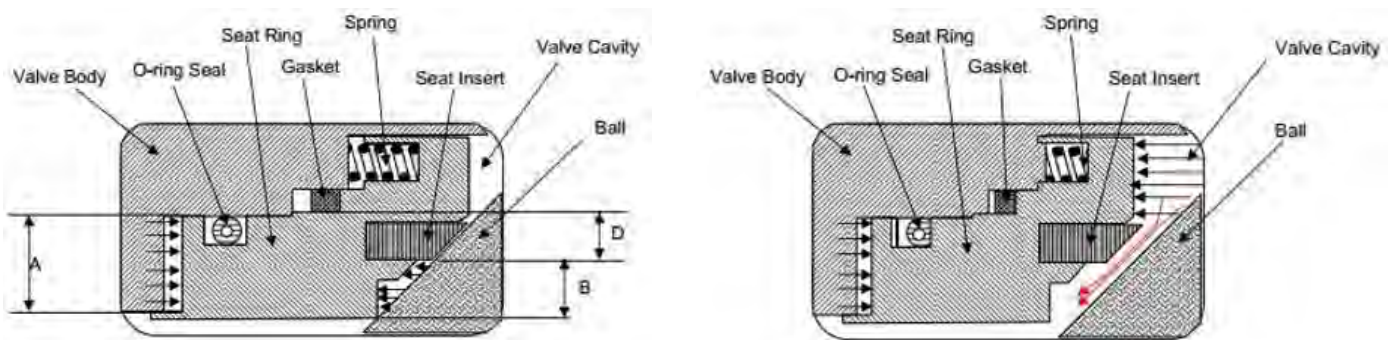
SPE/SR seat assembly mechanism (illustration on a soft ball valve)
